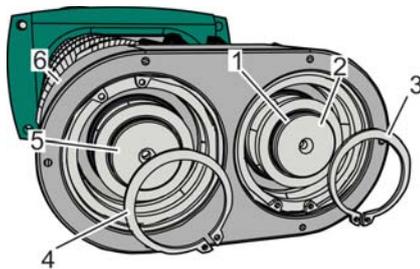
Disassembling the outer retaining ring from the drive shaft, example
